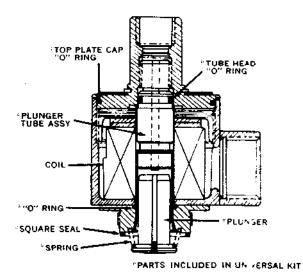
Typical Three-Way Expl. Proof Valve Actuator Cross-Section
